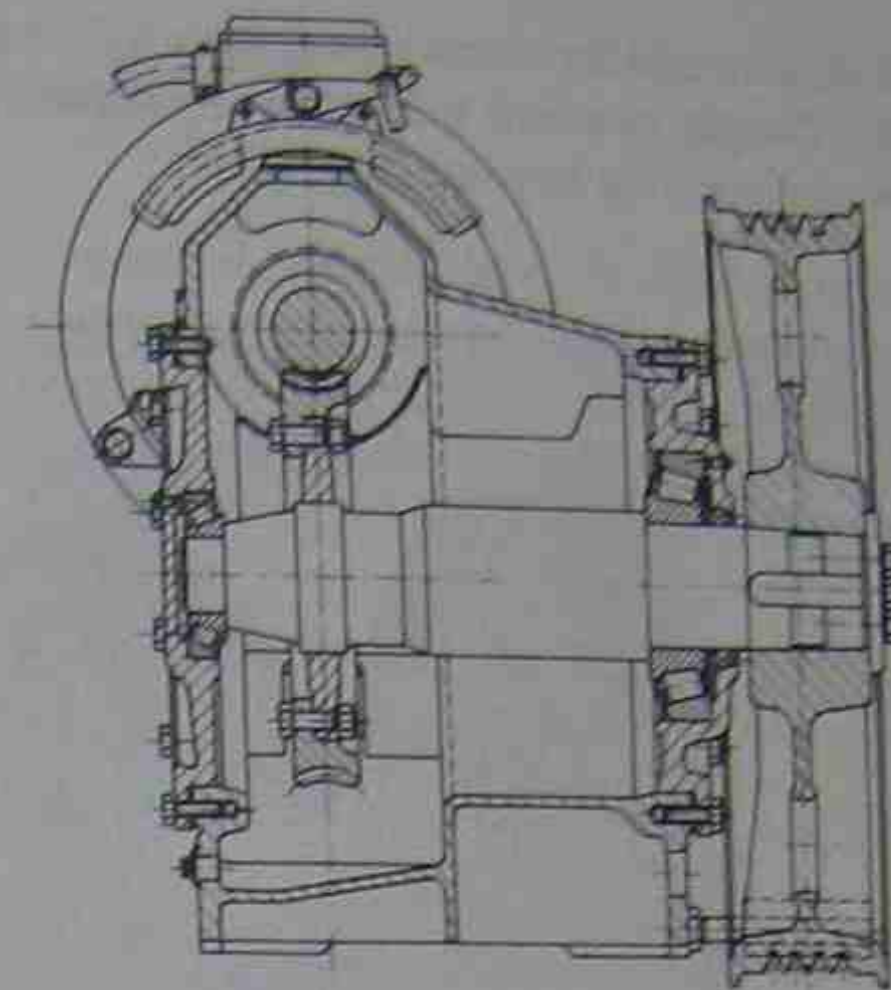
Cross-sectional view of the low-speed shaft with the sheave overhung (Otis Elevator Co.).
